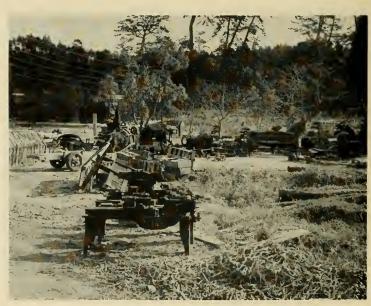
Oami plant. Machine tools awaiting installation.
